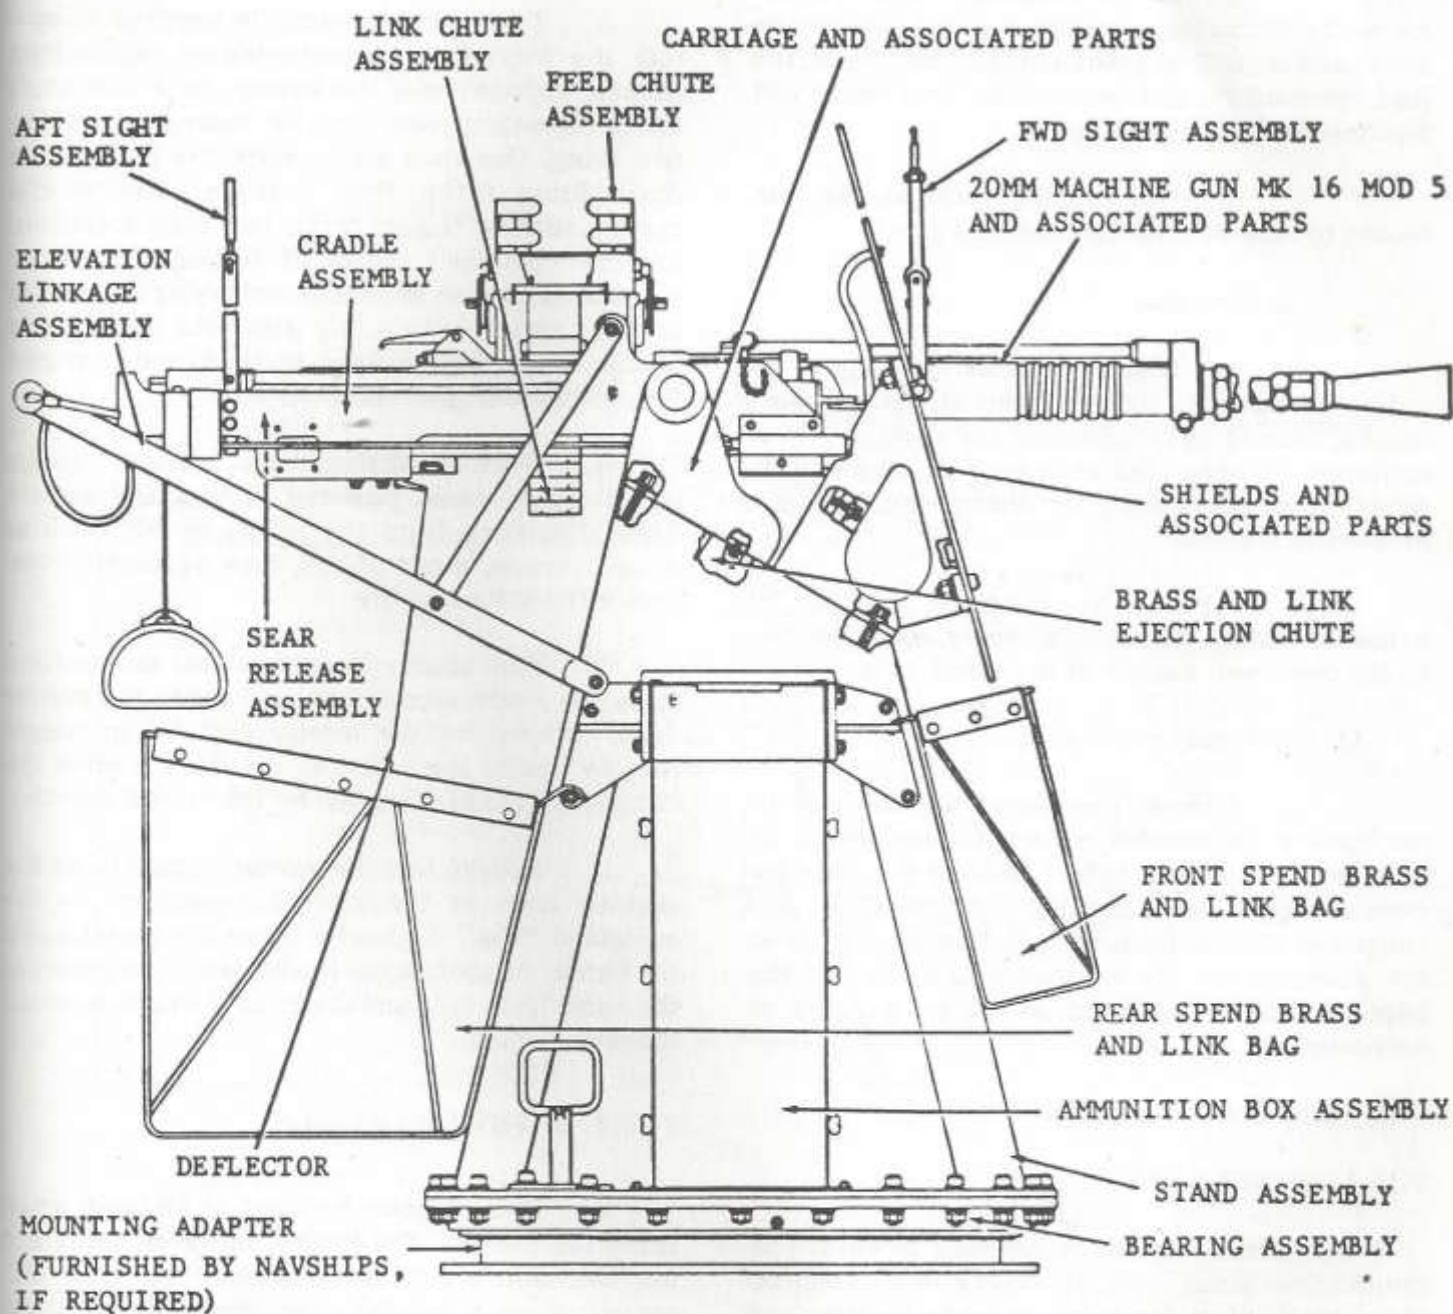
"MOUNT 20MM MACHINE GUN MK 67 MOD 1"
